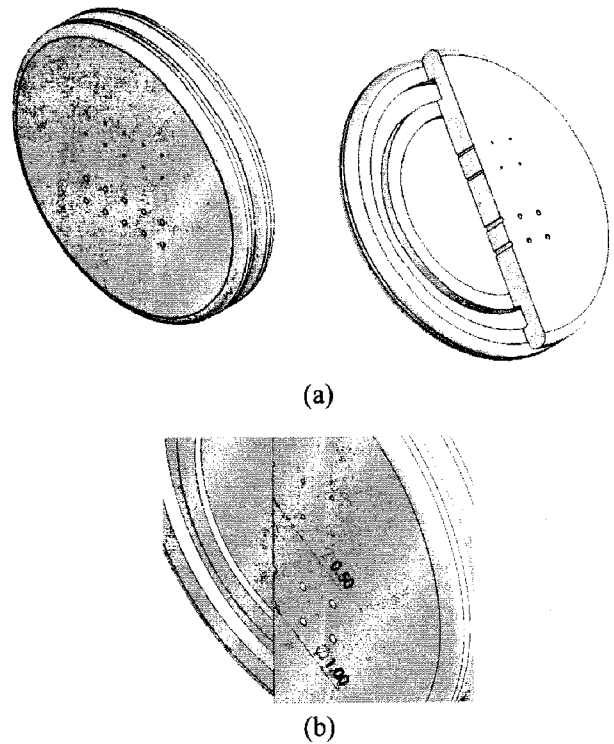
3-D CAD model of embossing die and embossing pattern size (mm)
